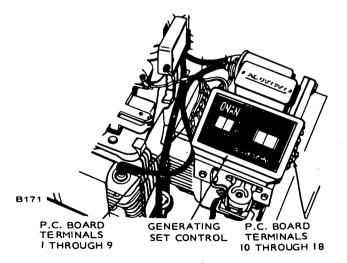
GENERATING SET CONTROL ASSEMBLY
